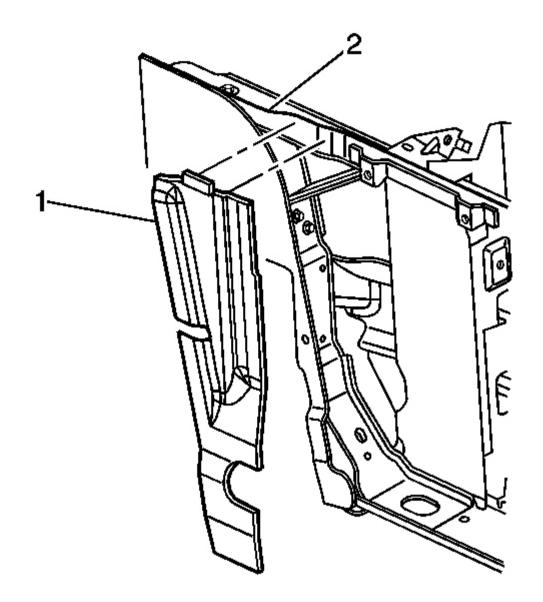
Radiator Air Baffles Courtesy of GENERAL MOTORS CORP.
